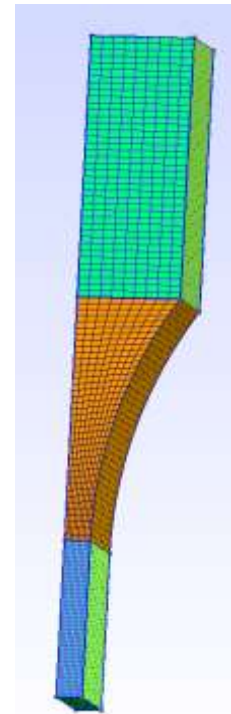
Specimens with Tangentially Blending Fillets Between the Uniform Test Section and the Ends
